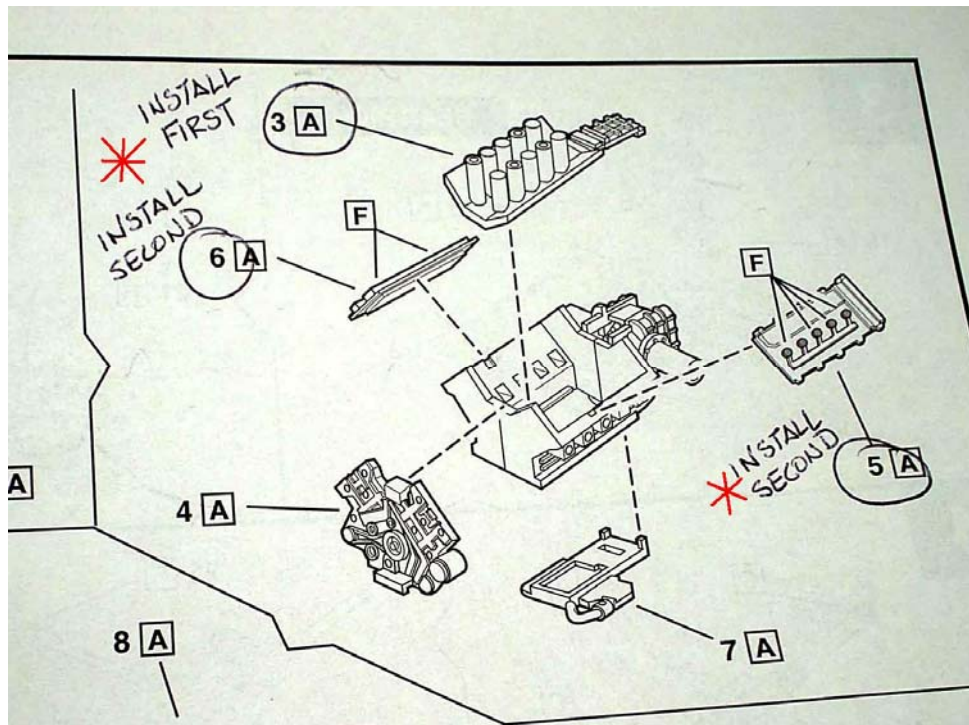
, 2) I began by assembling the engine, which actually is a "two-part" affair. The first consists of a two-piece engine block, front cover, oil pan (engine bottom), intake manifold, rear cover, oil filter, two-piece axle shaft, and two exhaust pipes. I assembled and painted everything but the last two items with Testor's buffable Aluminum Plate metalizer.
